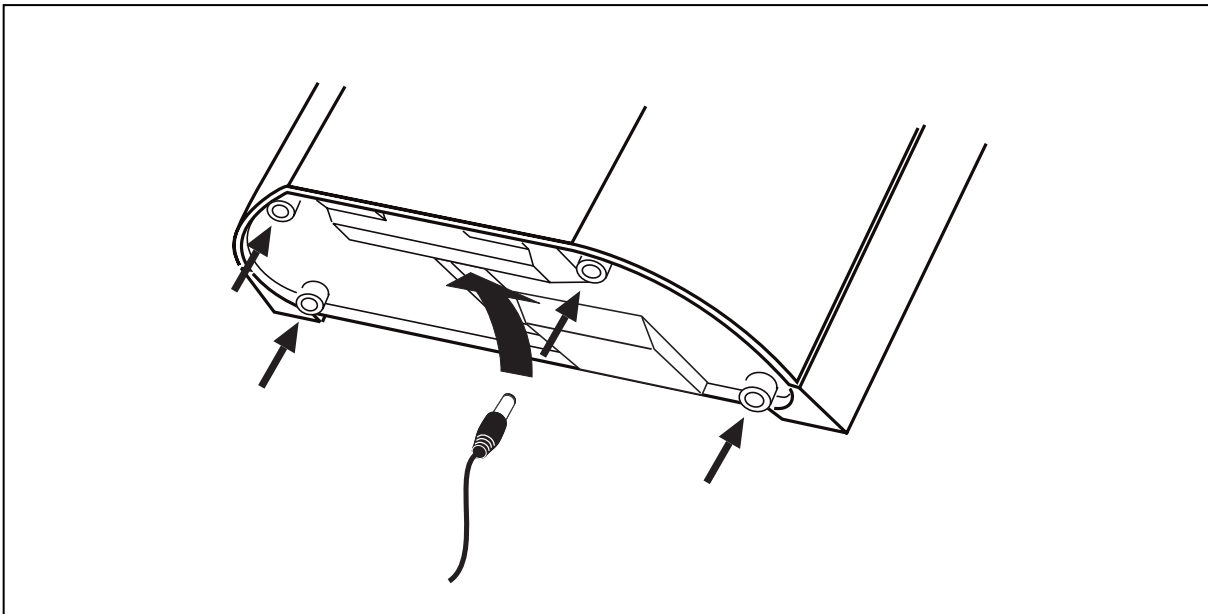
Bottom side of the recorder with rubber feet and mains cable socket
